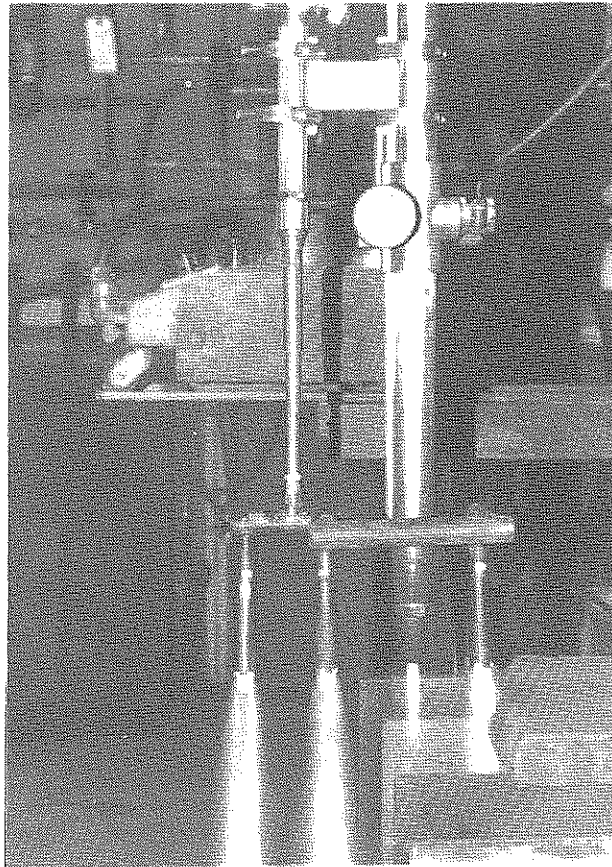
Photograph showing arrangement of auxiliary heat flame cutting fixture.
